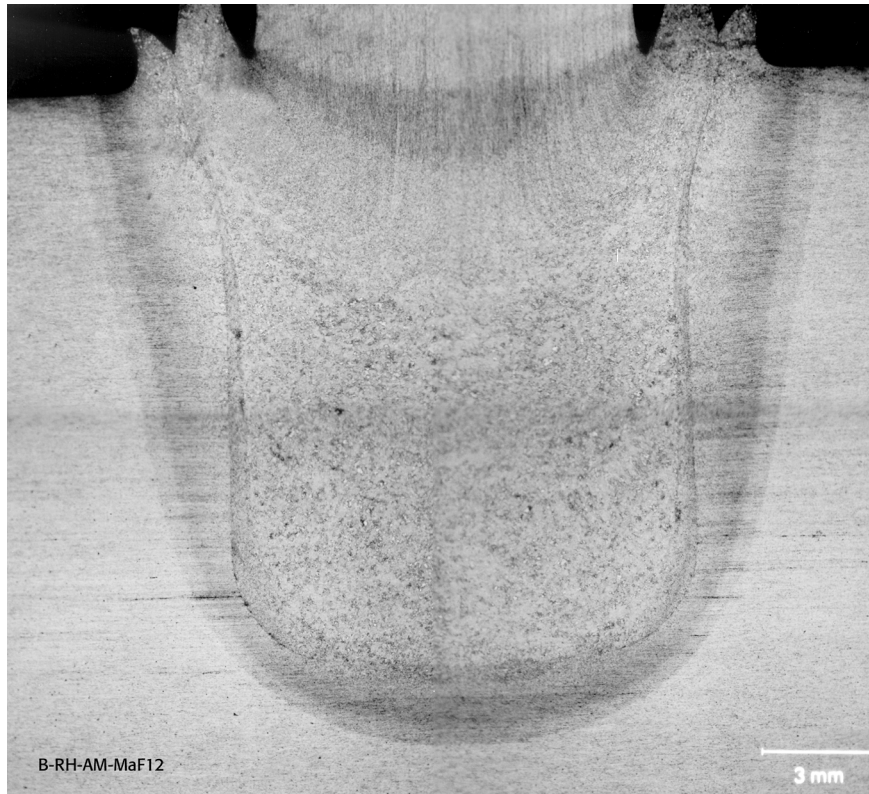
Macrograph of a weld in X65 with 10 mm stud diameter and rounded transition at the bottom of the hole.
